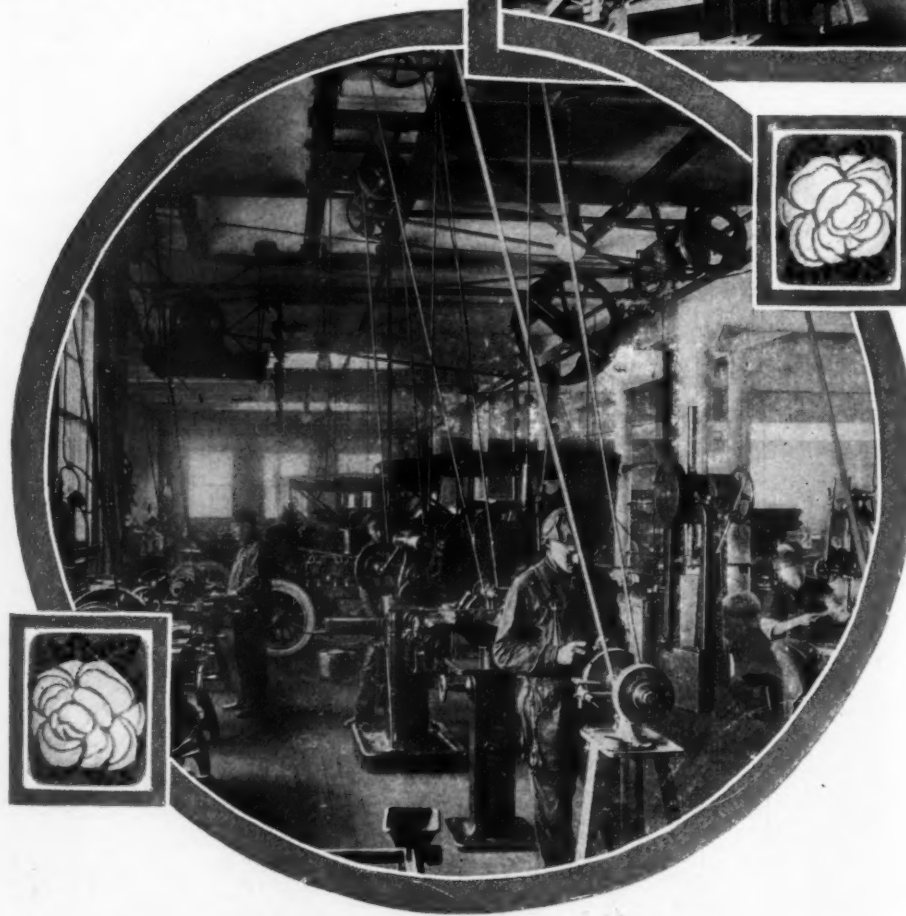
WINTON MACHINE SHOP, SHOWING PART OF EQUIPMENT FOR HANDLING REPAIRS
